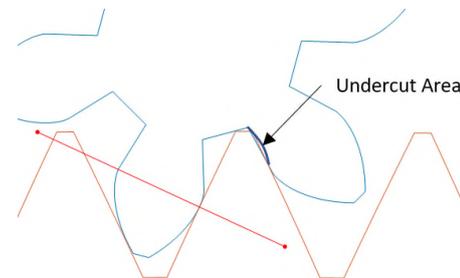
Undercut Tooth due to Tip-to-Flank Interference Between Hob (Orange) and Part (Blue)
